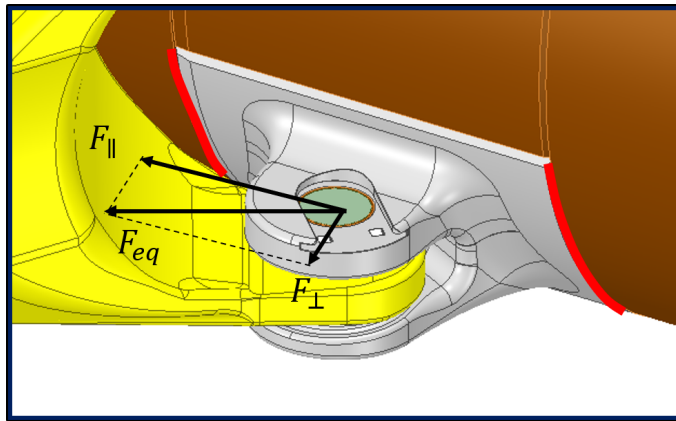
Equivalent axial force on the lower casting decomposed in a parallel and perpendicular component
